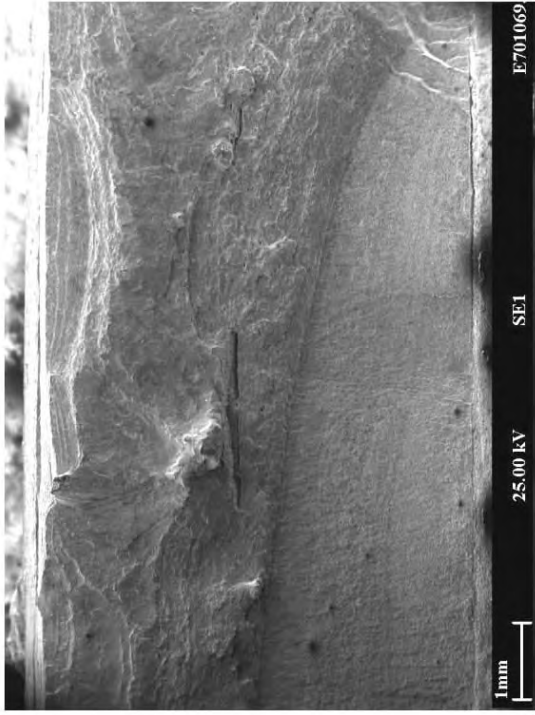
SEM fractograph, showing deep principal fatigue crack (lower field), shallow secondary fatigue cracks (upper field) and ductile terminal fracture between the two crack fronts - starboard side keel blade fracture.
